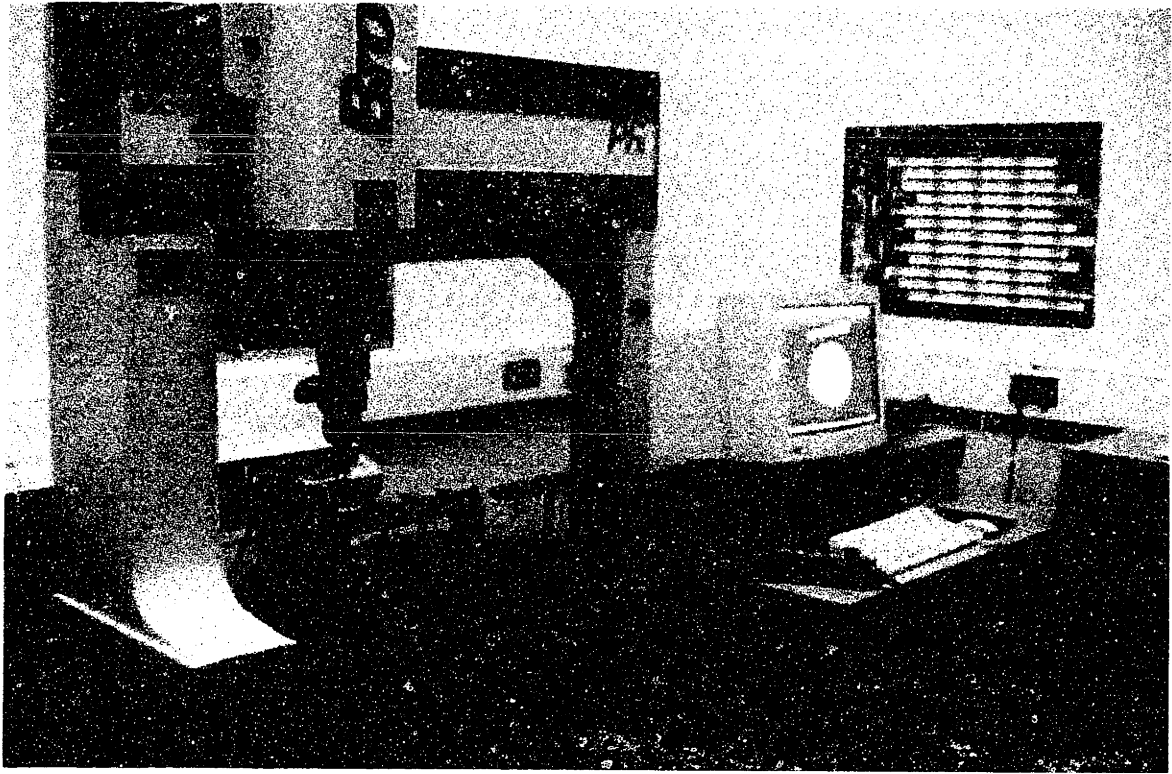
Coordinate Measurement Machine (CMM) Inspection Equipment.
